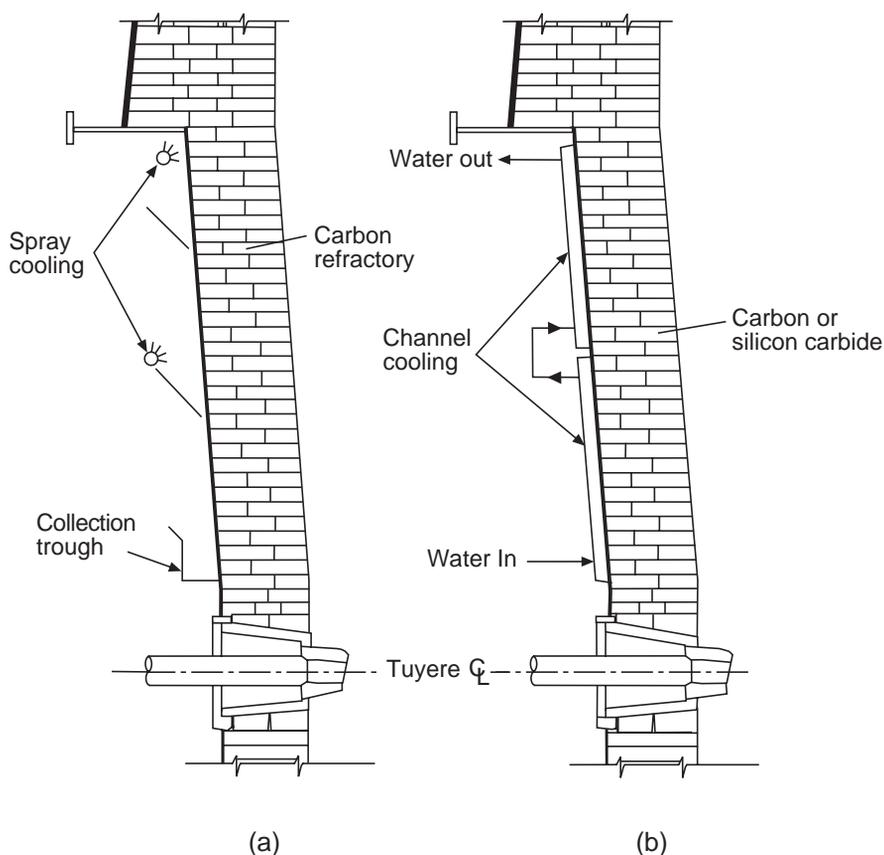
Cooling types for gas-tight bosh jackets: (a) spray cooling, (b) enclosed water panels or channel cooling.
